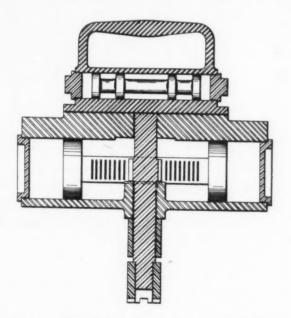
Sectional View of the Cleveland Oscillating Valve $$\operatorname{Grinder}$.$
